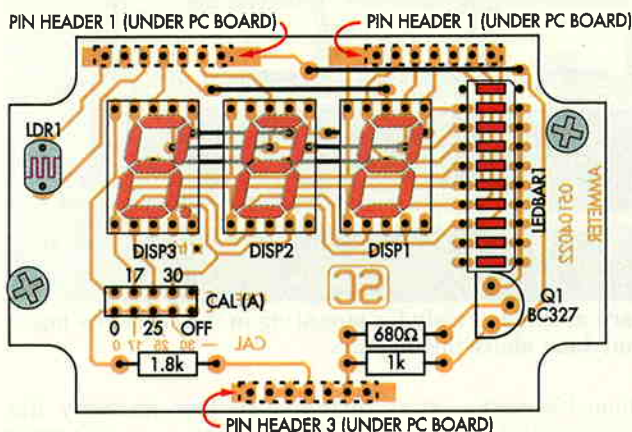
the parts layout on the sensor board is shown above, while at left is the display board.
